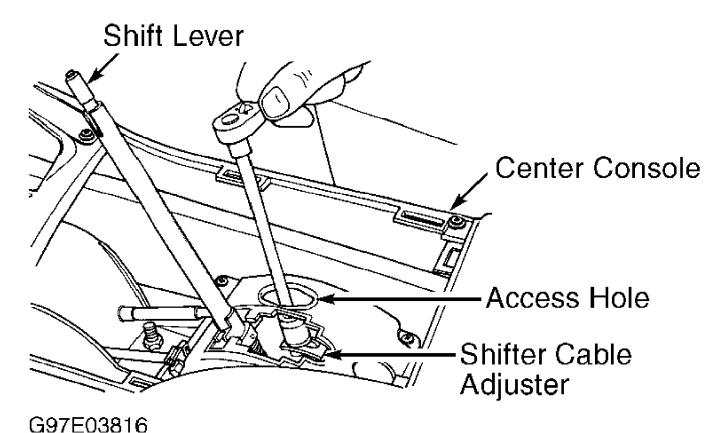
Locating Shift Cable Adjuster Nut (42LE Transaxle) Courtesy of DaimlerChrysler Corp.
